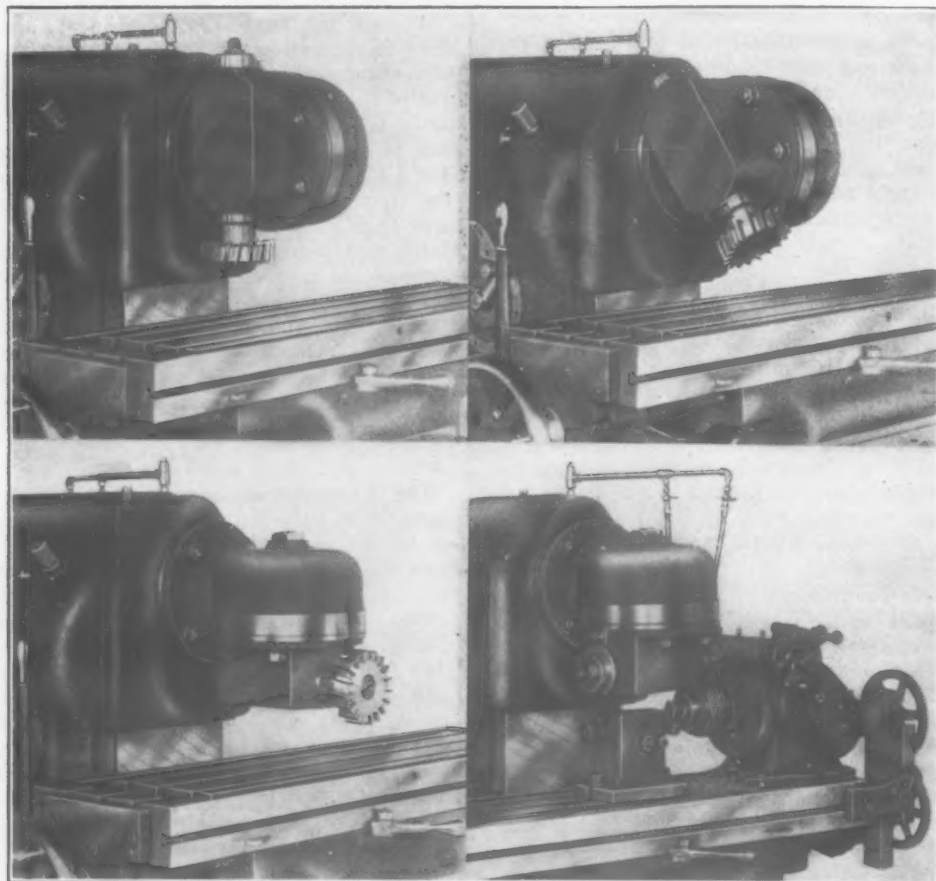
Various Settings of the Milwaukee Universal Milling Attachment.
